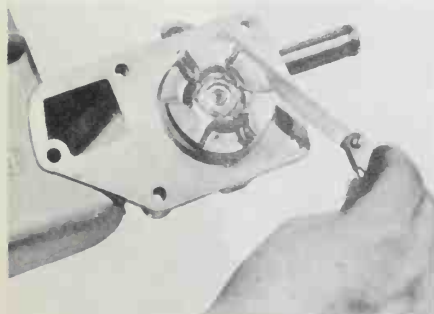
Measure clearance between water pump flange and impeller. Maximum clearance is 1 mm.
